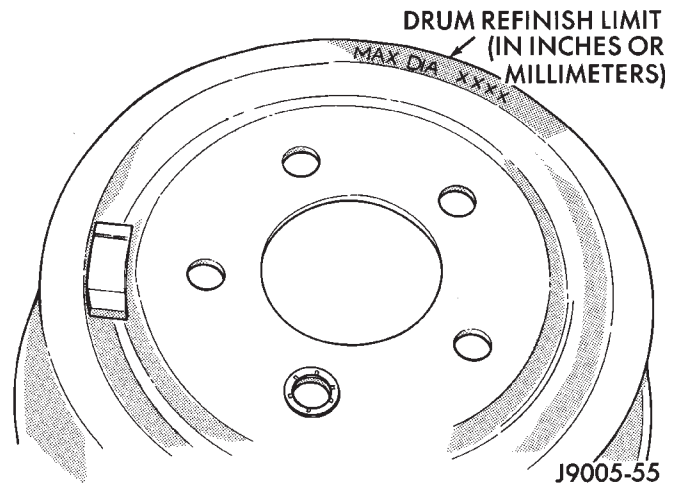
Typical Location Of Brake Drum Refinish Limit
